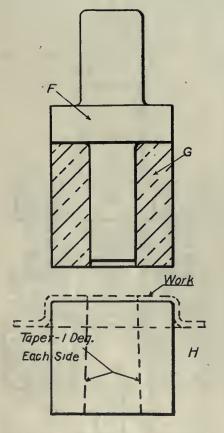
PIERCING PUNCH WITH RUBBER STRIFPER.
